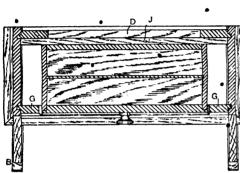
Horizontal Section through Music Cabinet with Swinging Drawers.
